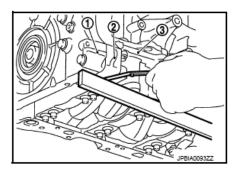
Checking Surface Height Difference Oil Pan Mounting Surface Parts (Upper) Courtesy of NISSAN MOTOR CO., U.S.A.
